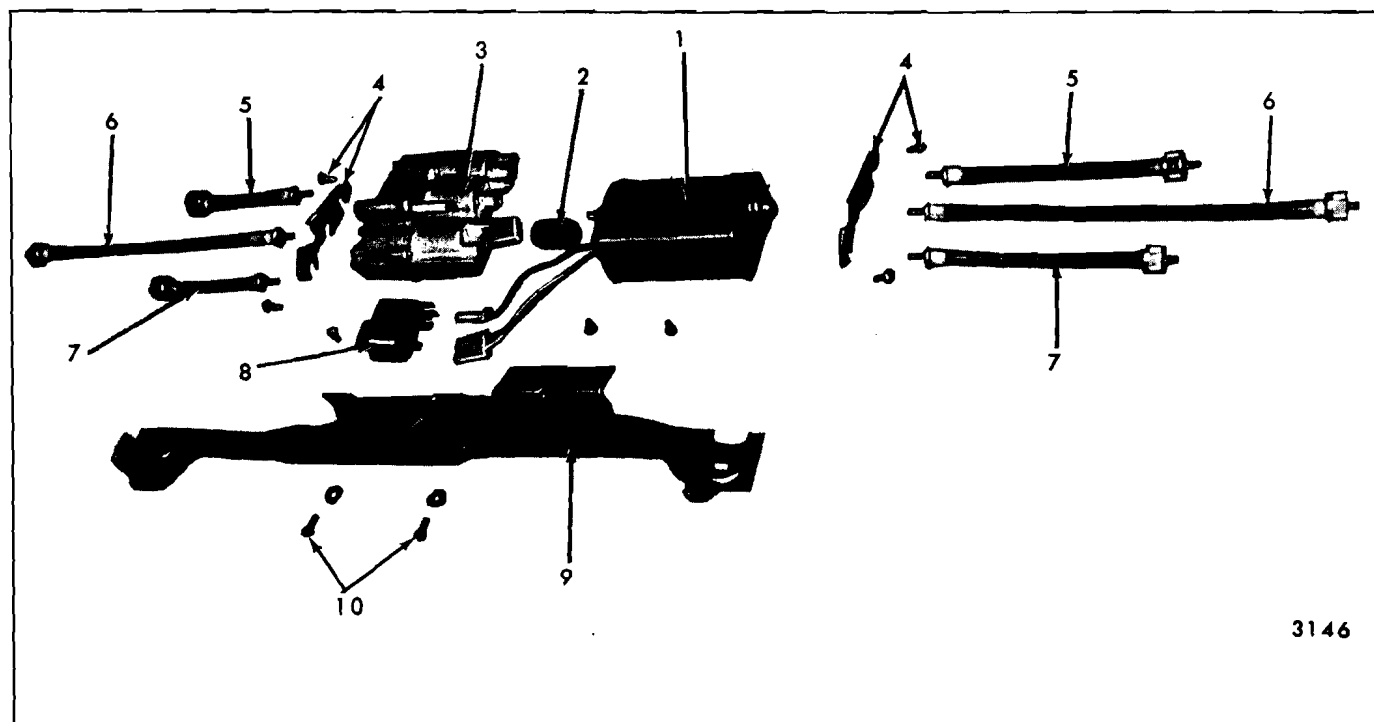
Six-Way Seat Adjuster Motor, Transmission, Cable and Support - Disassembled - Buick, Oldsmobile and Cadillac 60-40 Seats
